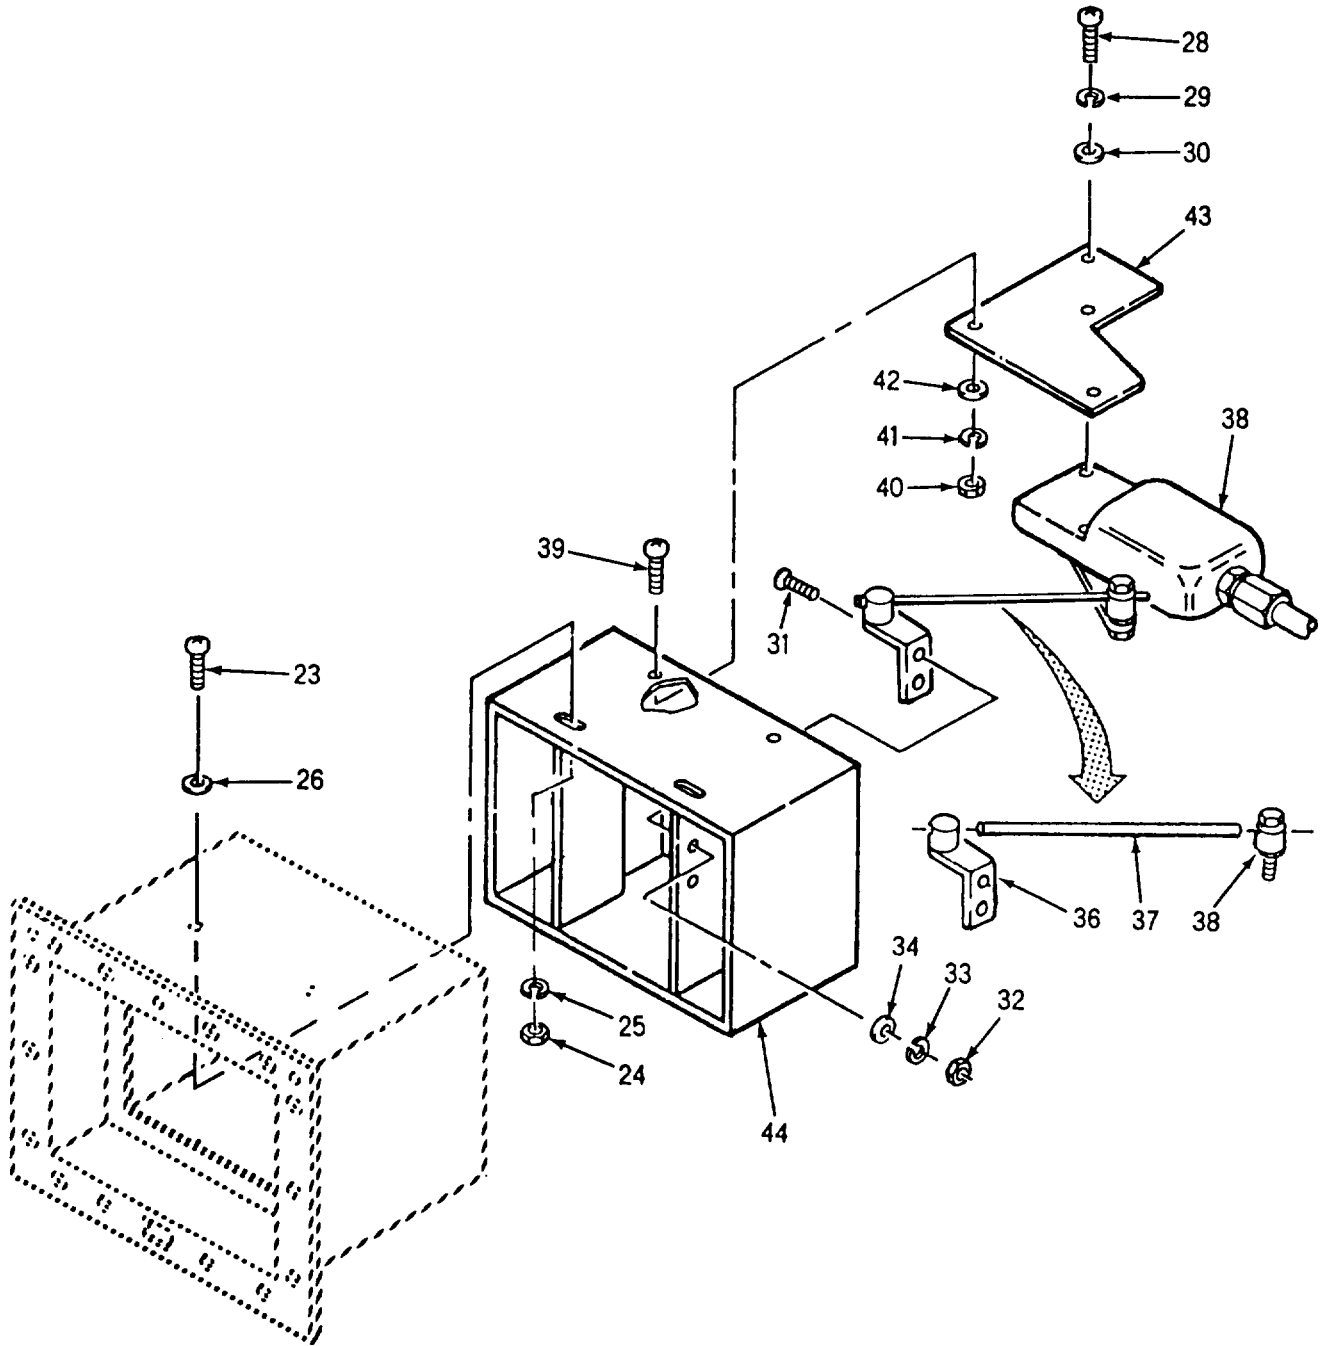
Purge Port Damper Motors (Sheet 2 of 2)
